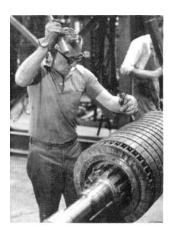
A worker is performing swaging to tighten the bar material in the rotor slot.
